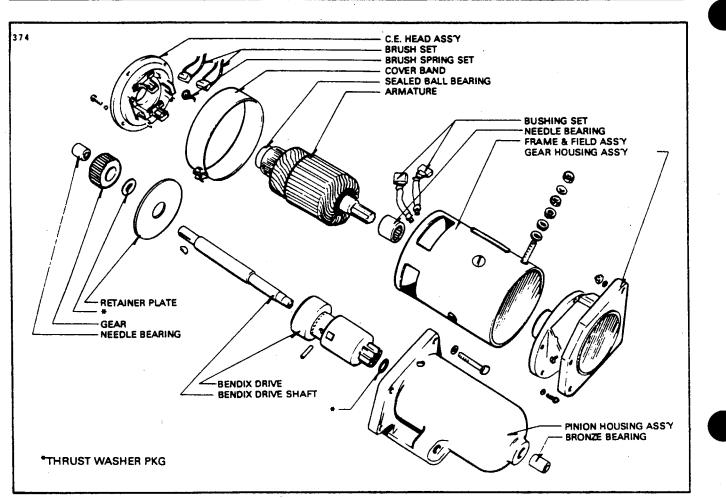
Exploded View of Gear Reduction Starting Motor
